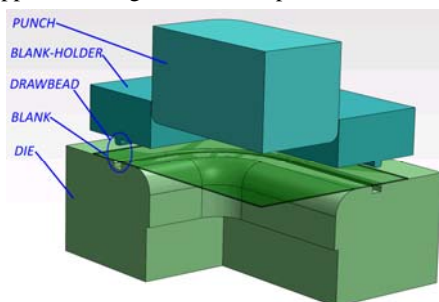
Drawing tool corner parts disposition and location of drawbeads
